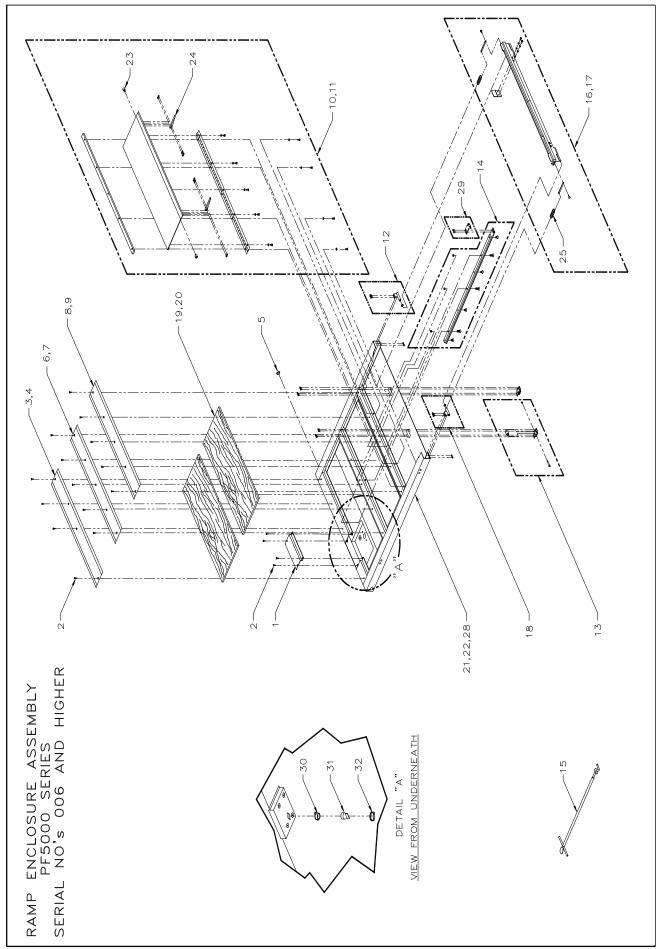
PF5000 SERIES RAMP ENCLOSURE ASSEMBLY
